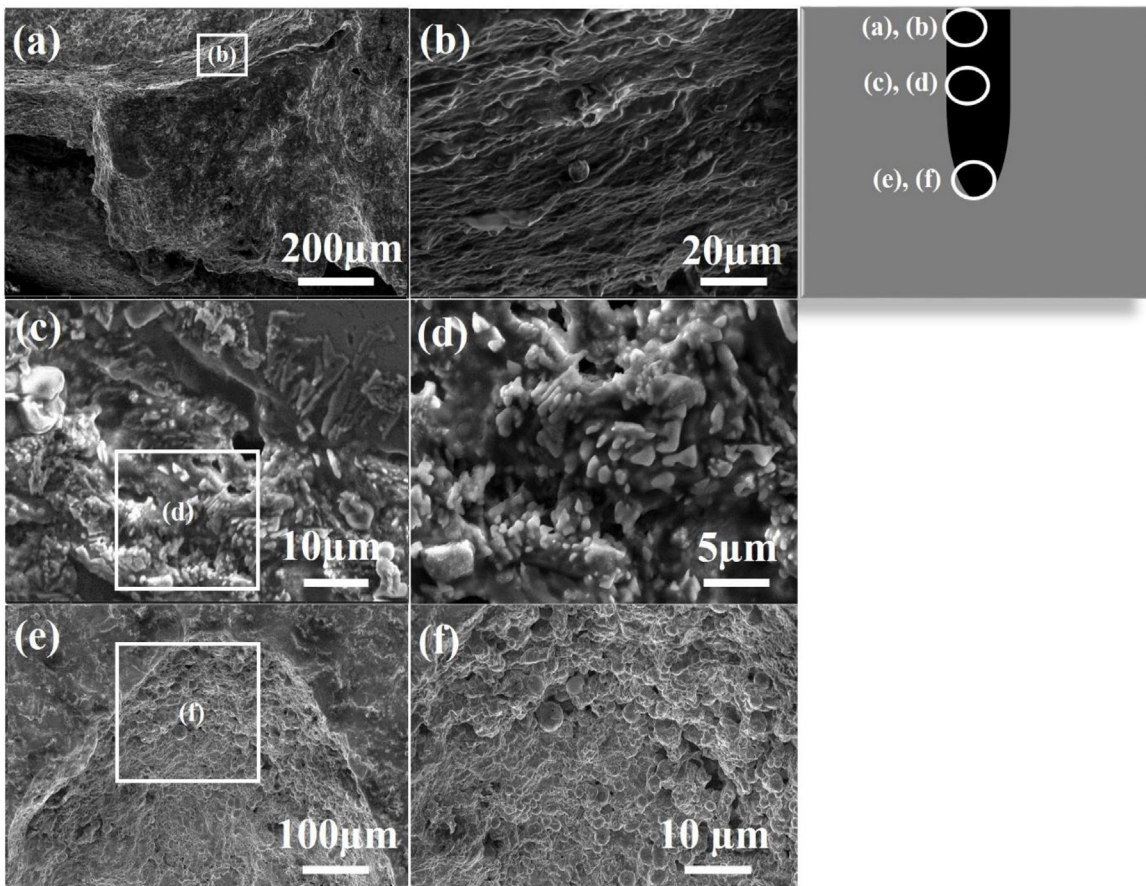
The SEM images of the Al alloy after hard steel projectile penetration showing the fracture surface: (a, b) upper side view, (c, d) middle side view and (e, f) bottom side view.
